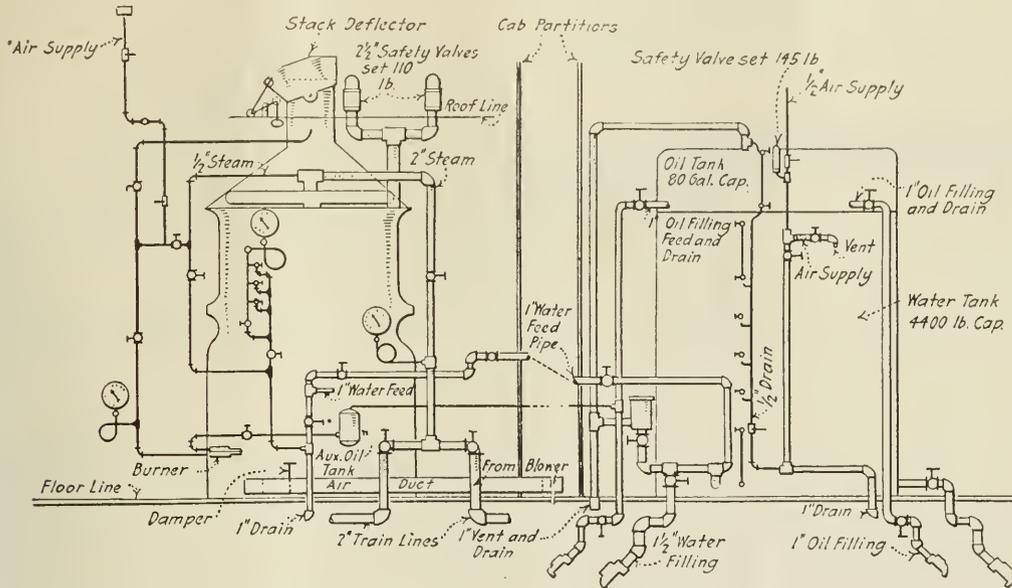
Assembly Diagram of Oil Fired Boiler
